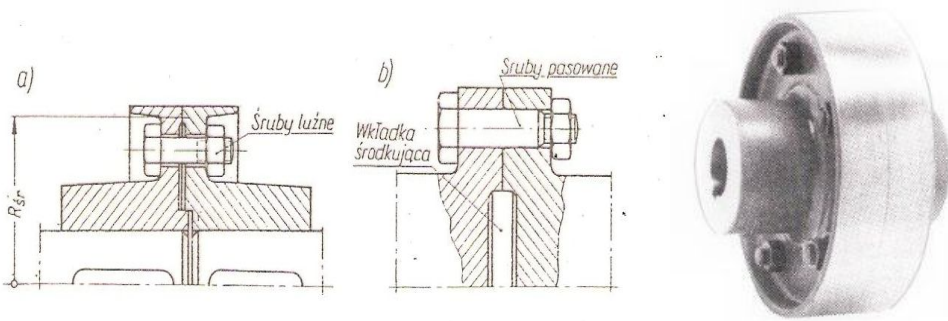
Flanged coupling [10, Royersford]. Legend: śruby luźne = loose bolts; wkładka centrująca = centring piece; śruby pasowane = fitted bolts
